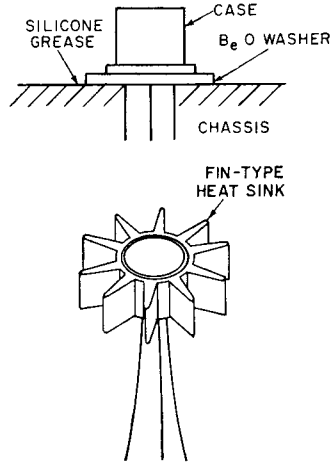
Mounting arrangements for transistors in JEDEC TO-5 packages.
